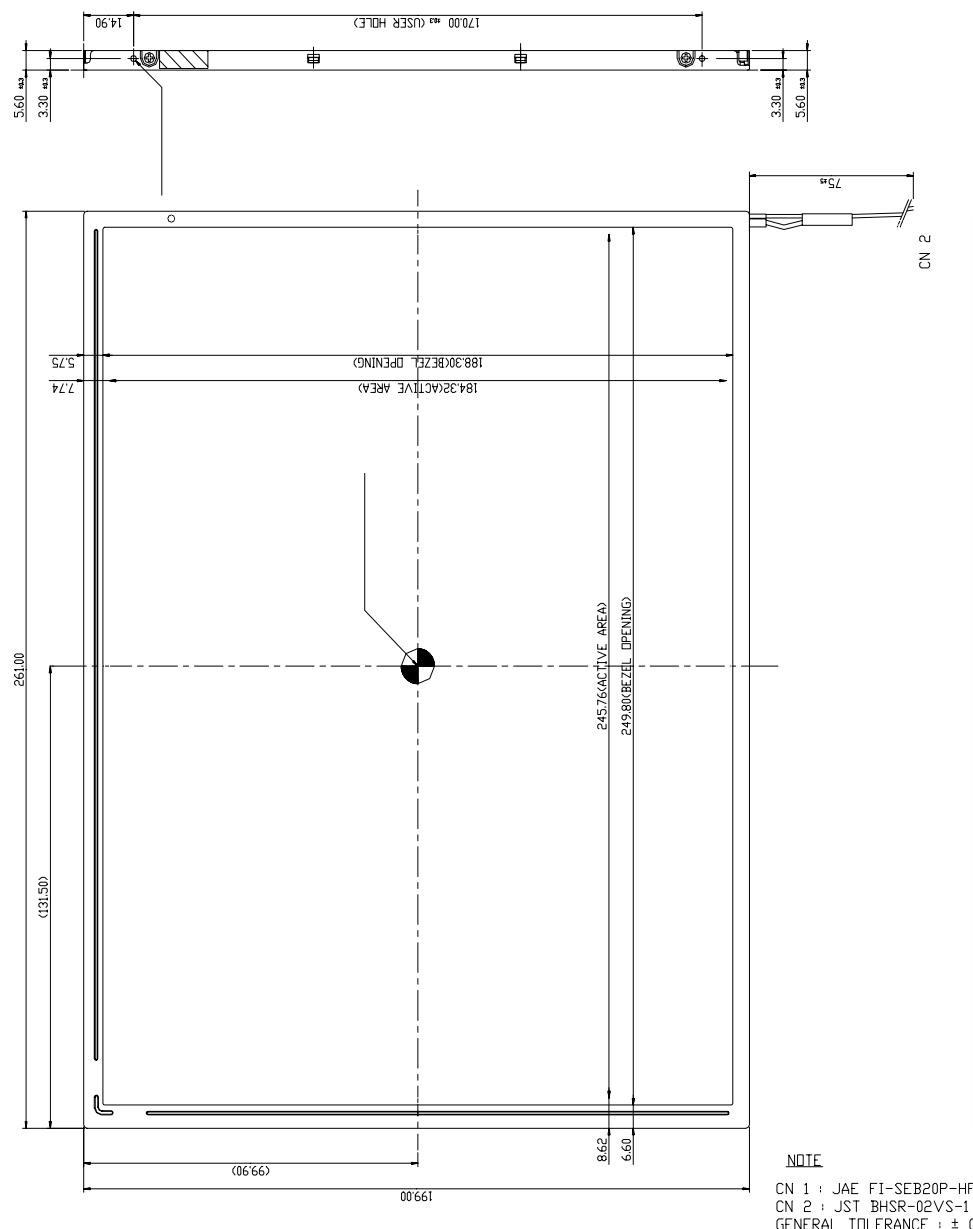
TFT-LCD Module Outline Dimensions (Back view)
